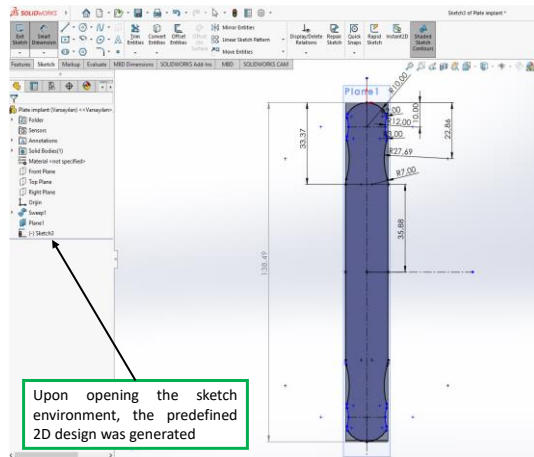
Two-dimensional detailed design of the plate implant on the newly created plane.
